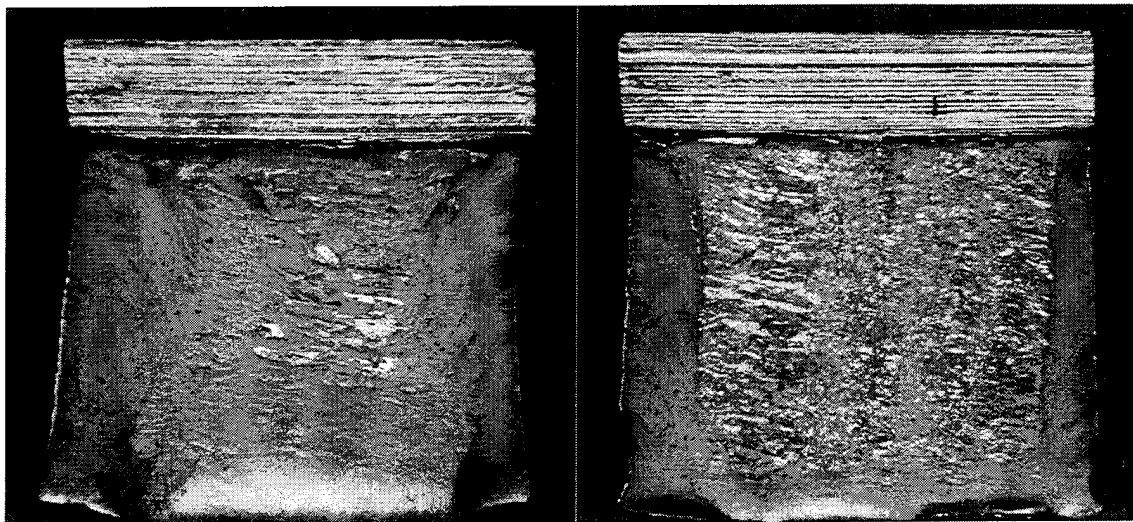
MV5 Ductile and Brittle Fracture Surfaces (6.4 x)
